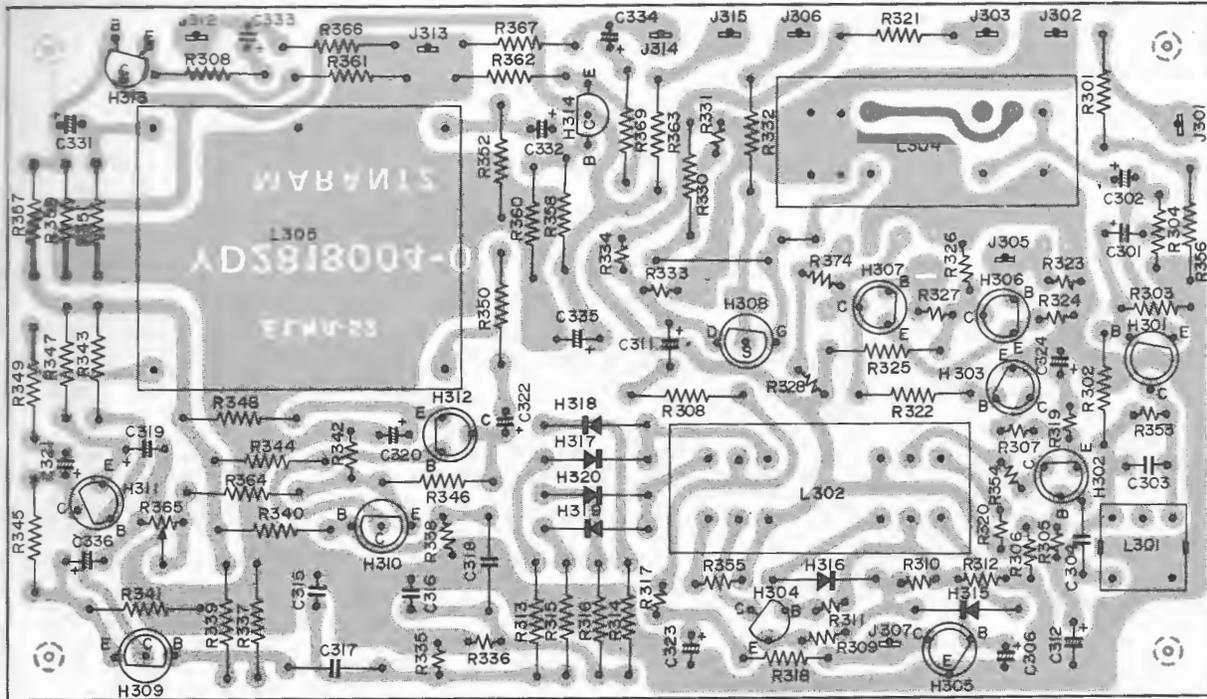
MPX Stereo Decoding Amplifier Assembly P300 Component Locations
